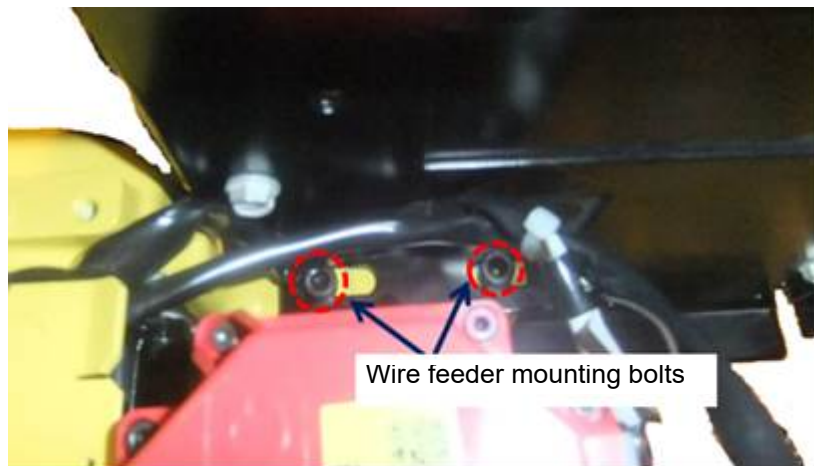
(b) Replacing the wire feeder AutoDrive 4R220 (2/3)
